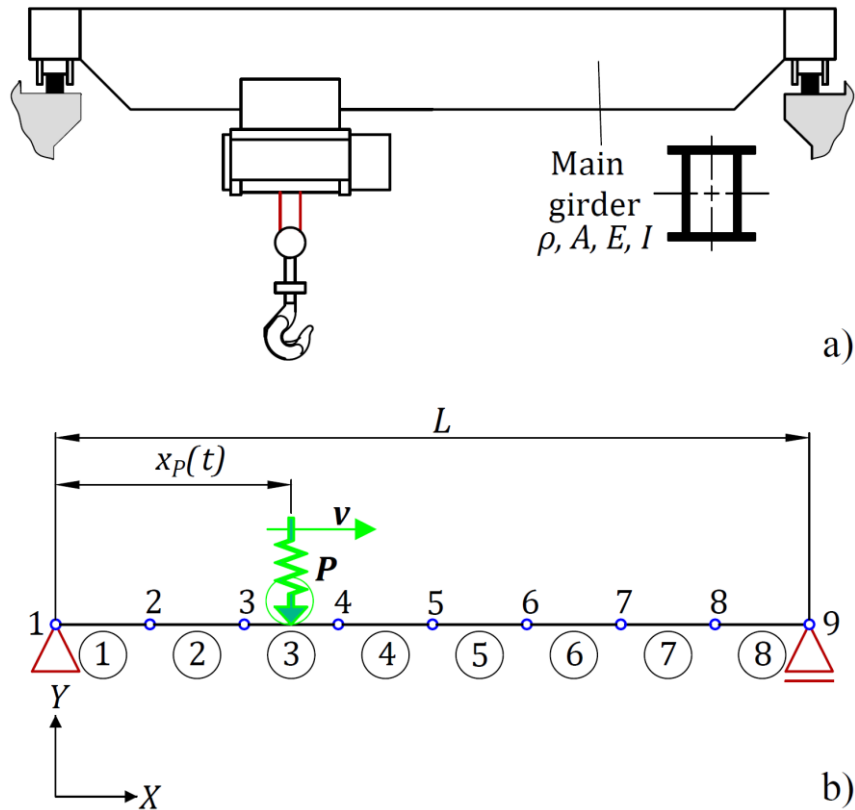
a) Sketch of a bridge crane, b) Finite element model with the moving load of a bridge crane
